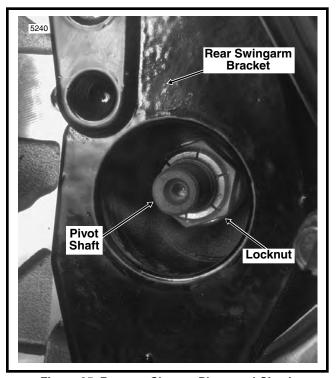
Remove Chrome Plugs and Check Pivot Shaft Locknut Torque
